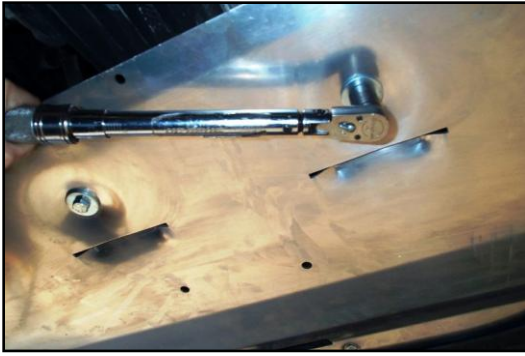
Finish install by tightening the two 10mm center bolts to no more than 30 lb./ft
